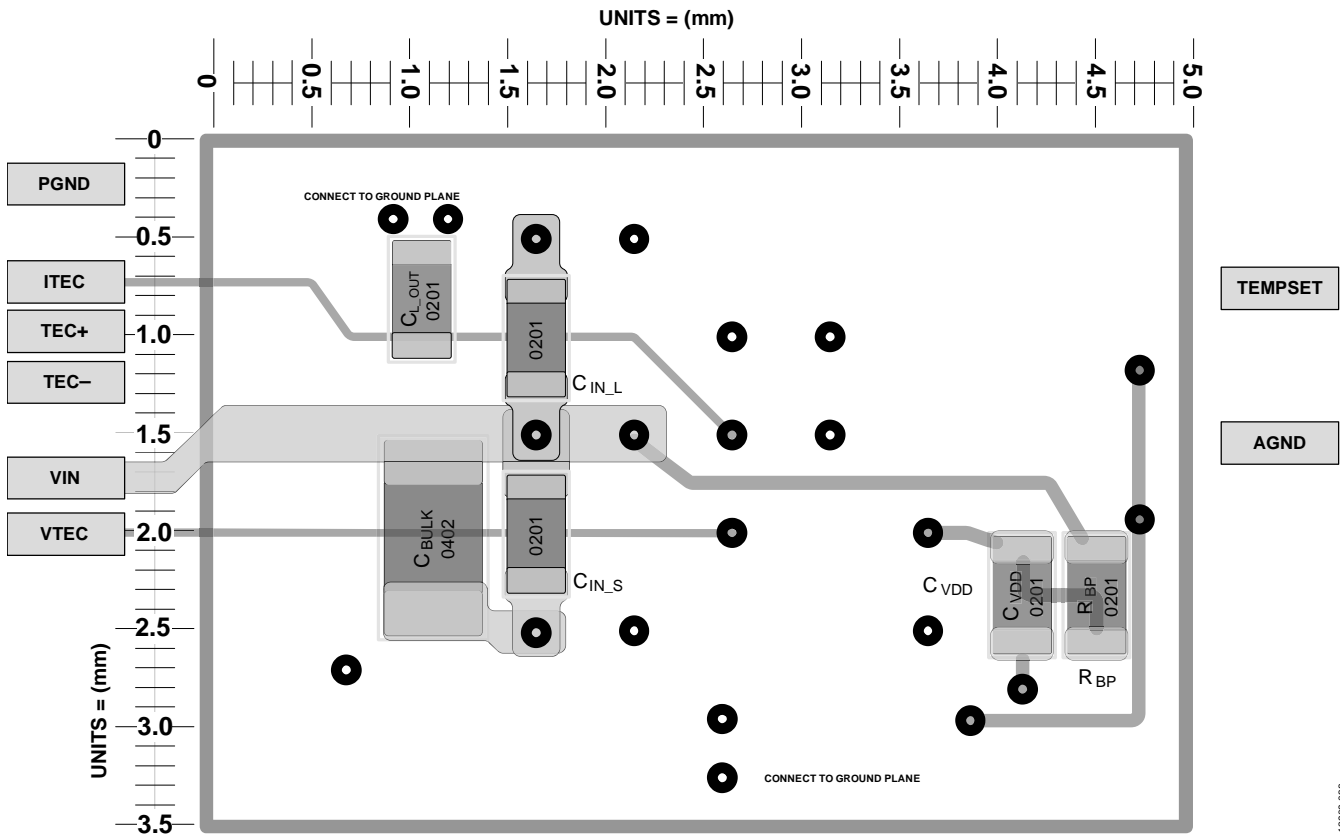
Example PCB Layout Using Two Layers (Bottom Layer Only)
